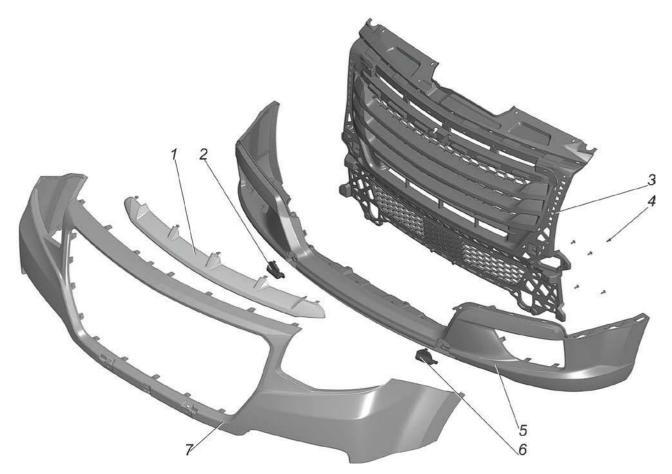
Front bumper panel: 1 – radiator grille molding; 2, 6 – hatch covers; 3 – radiator grille; 4 – screw; 5 – lower front bumper panel; 7 – front bumper panel (upper)
